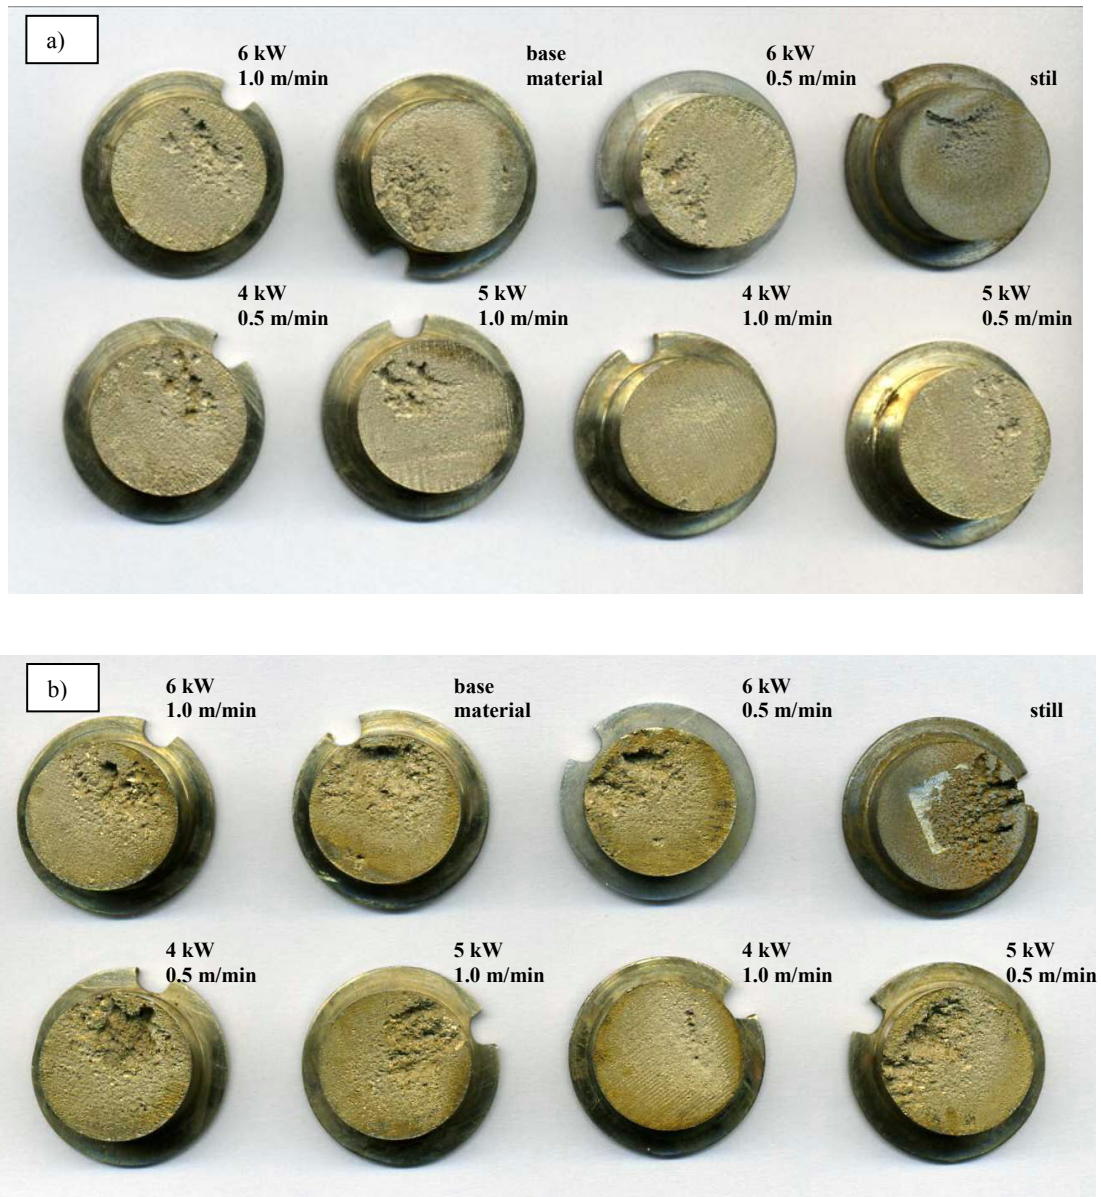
Surface of the laser remelted specimens after the cavitation test for: a – 150 min; b – 315 min
